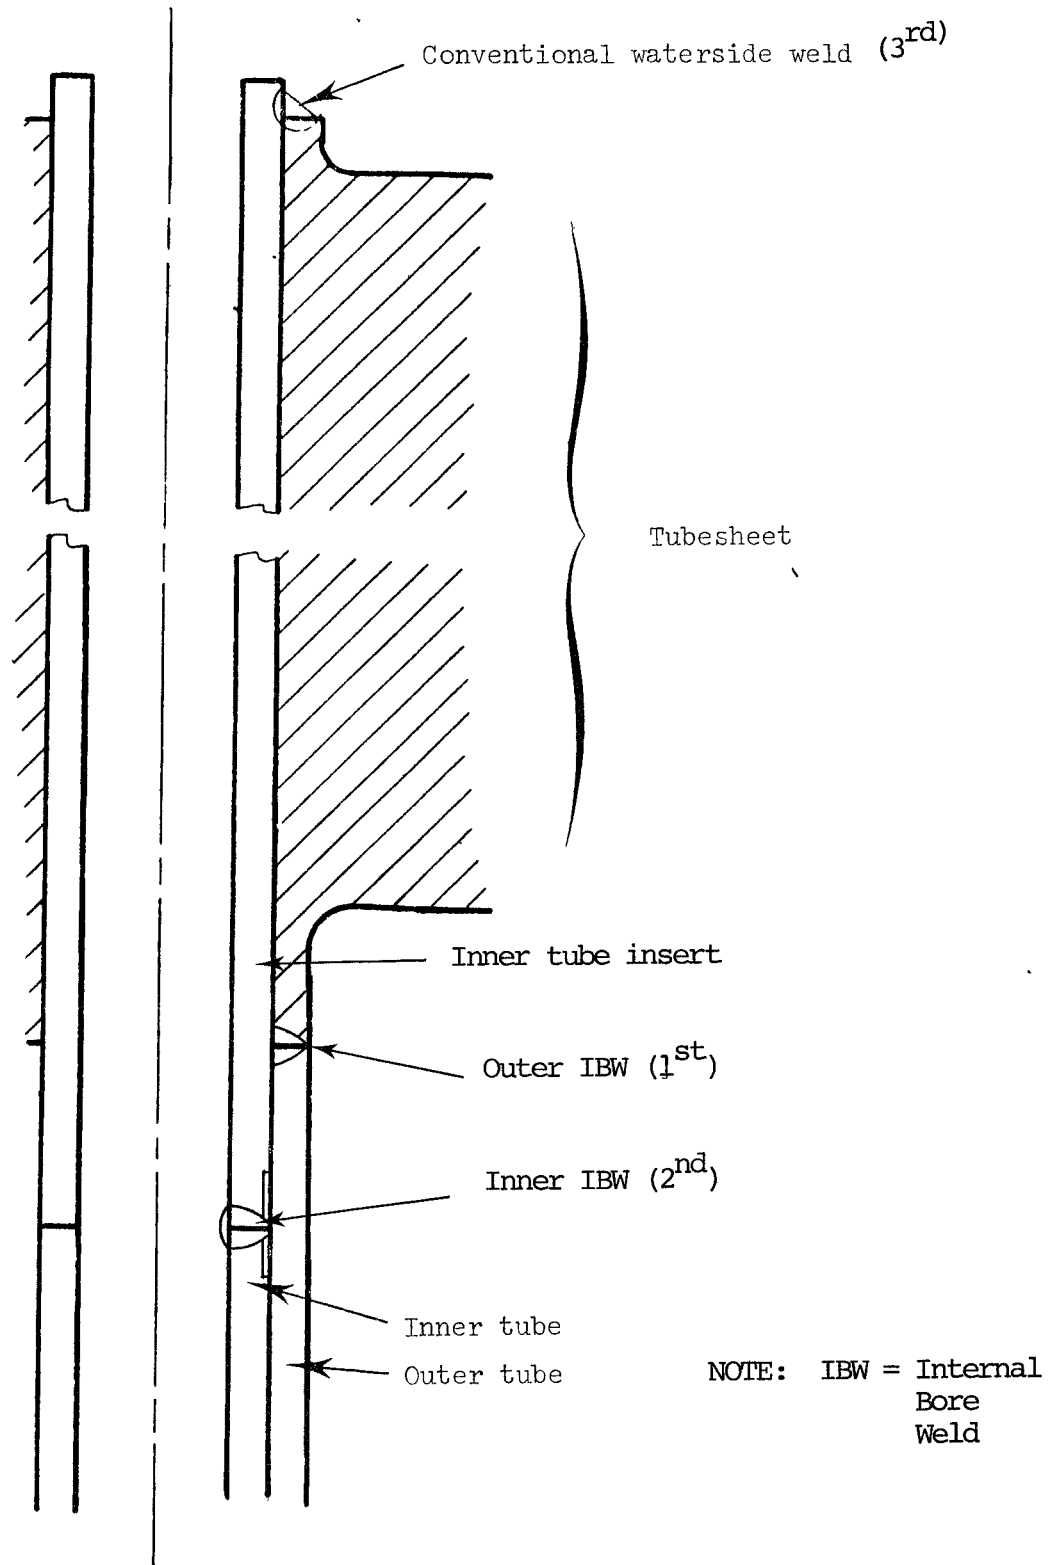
Internal Bore weld for Double-wall tube/tubesheet joint
